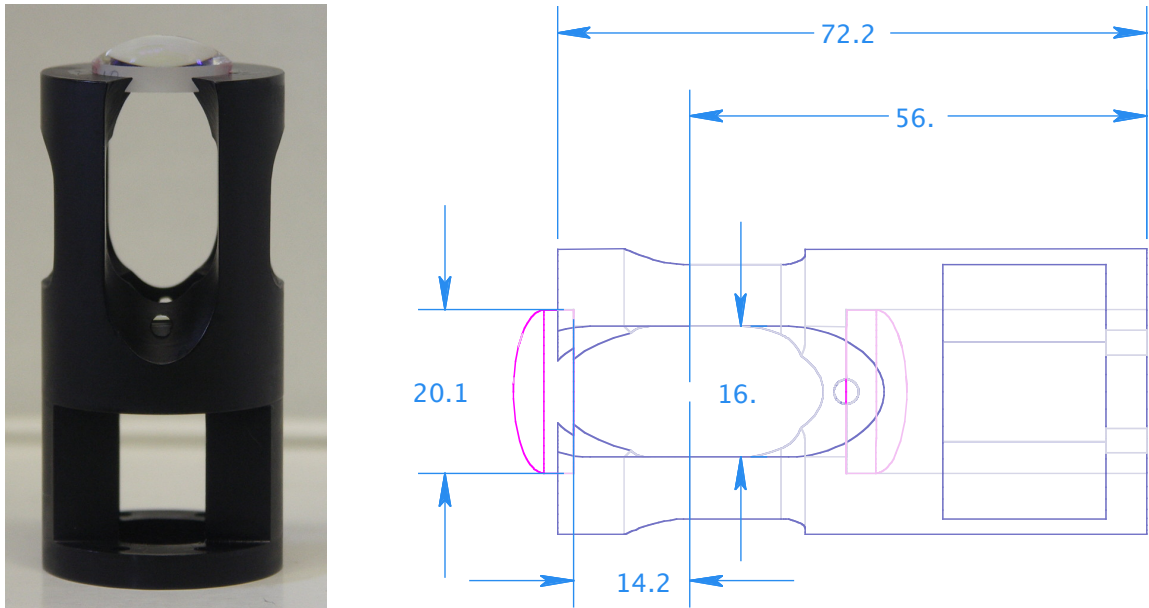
Photograph and dimensions of custom lens mount and dimensions from the CAD drawing.
